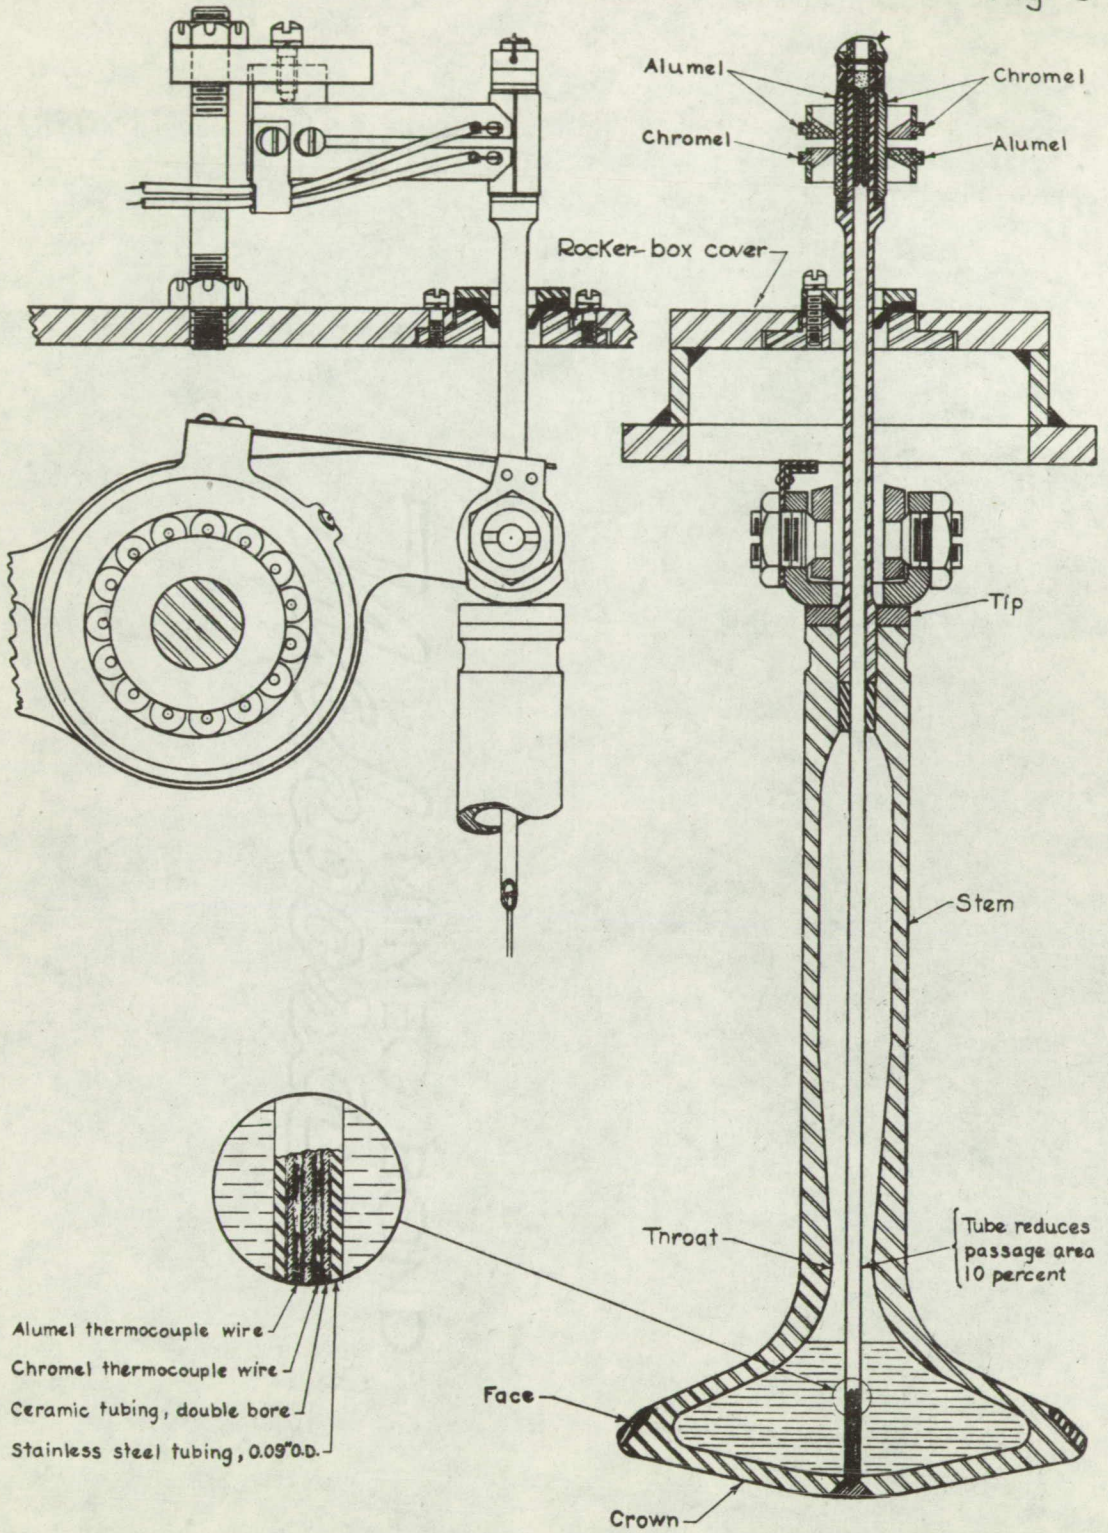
Details of sodium-cooled exhaust valve equipped with a thermocouple.
